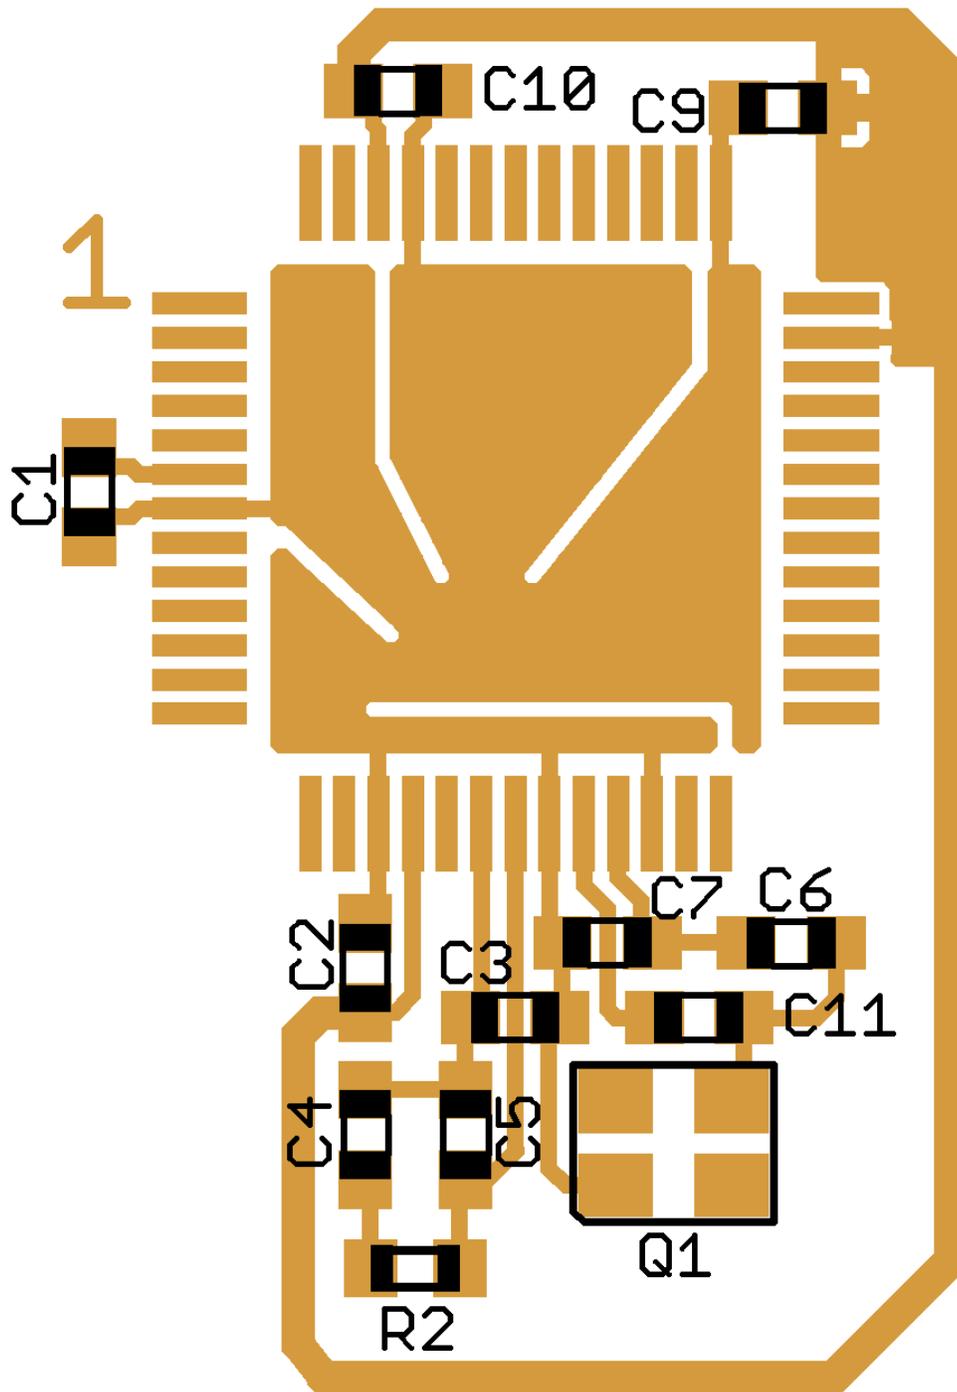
Recommended PCB Layout (52 LQFP) Colpitts Oscillator
